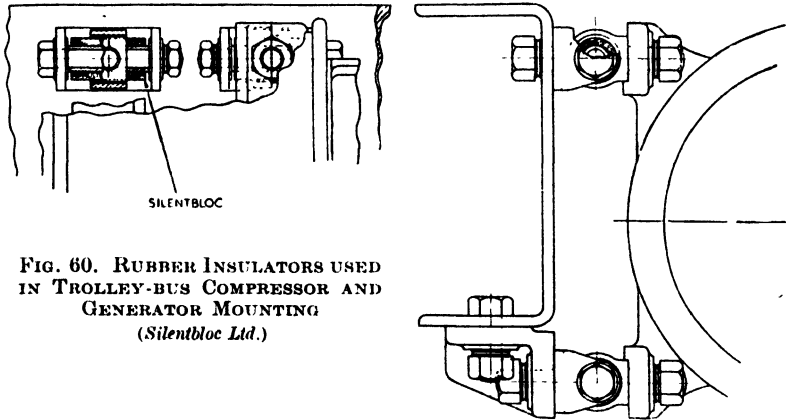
RUBBER INSULATORS USED IN TROLLEY-BUS COMPRESSOR AND GENERATOR MOUNTING
